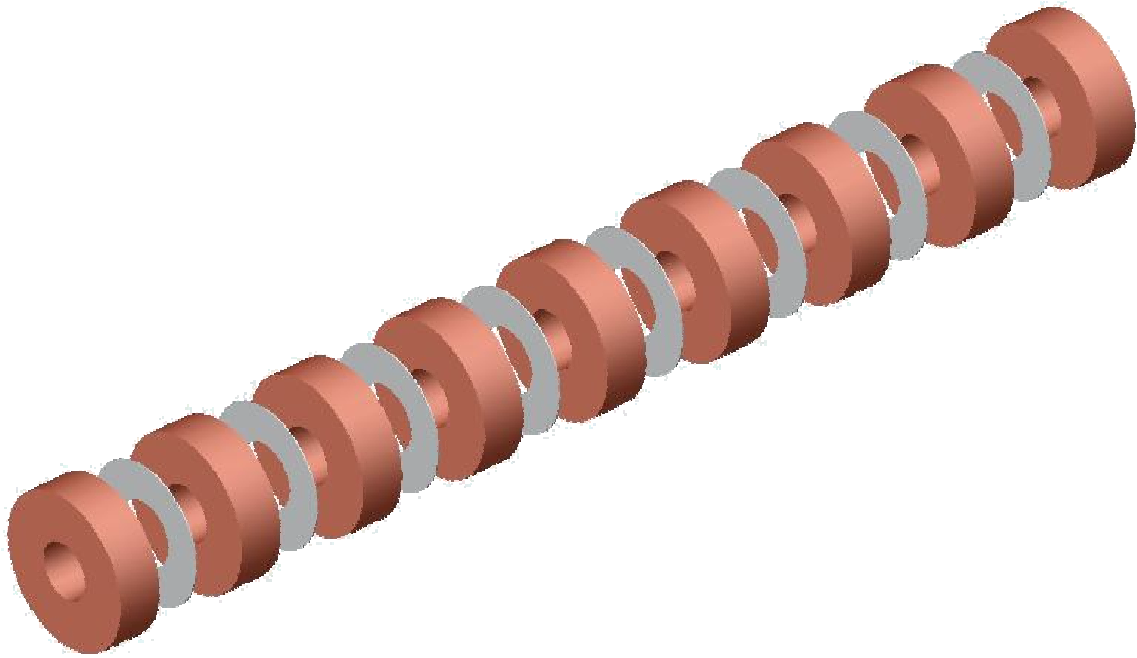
Exploded assembly of coils with polycarbonate spacers.
